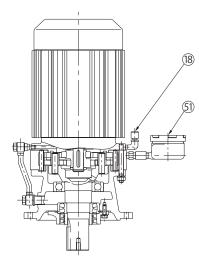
Type CVVM (Vertical, Gearmotor), Single Reduction (Example: Frame size 6145)
